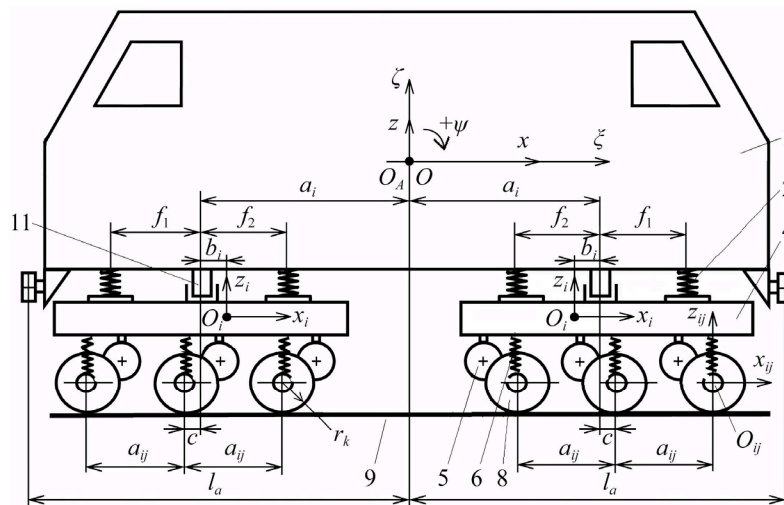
Undercarriage design diagram, side view: 1 – body; 2 – elastic-damping support; 4 – bogie frame; 5 – traction electric motor; 6 – elastic-damping suspension; 8 – wheelset; 9 – rails; 11 – pivot assembly
